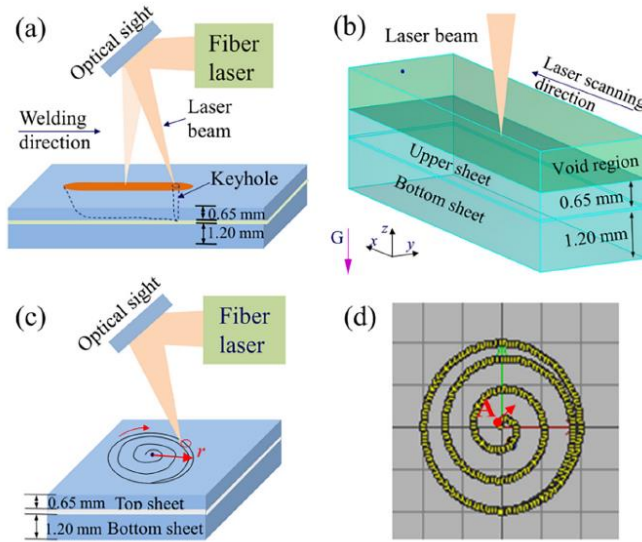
Experimental and model setup: (a) laser stitching setup, (b) *FLOW-3D WELD* model setup, (c) laser spiral welding setup and (d) laser spiral scanning path
